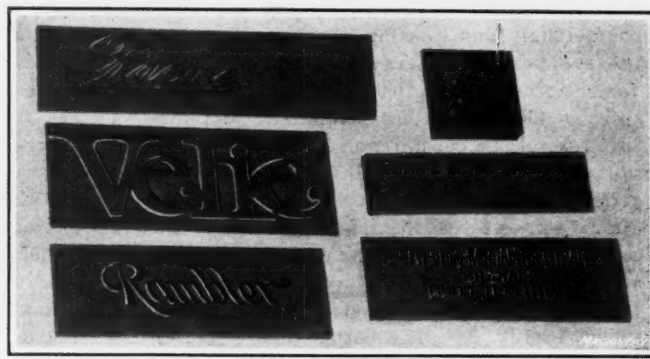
Examples of Flat Work engraved on Machines manufactured by the George Gorton Machine Co., of the Type shown in Fig. 29
